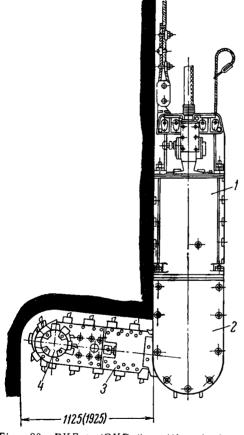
ГКД-4 (GKD-4) cutting-ripping machine
